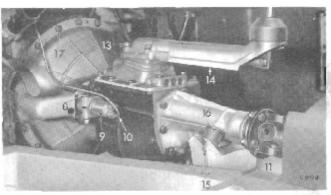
Herald 1200, 12/50 and Spittire gearbox attachments
